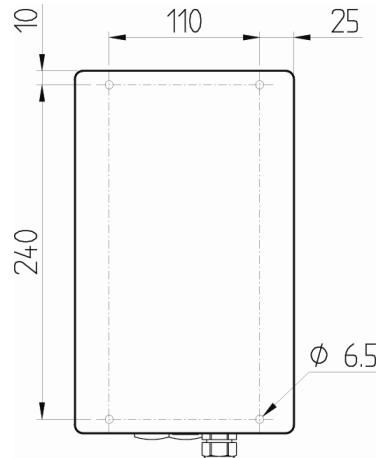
OPERATOR PANEL MOUNTING HOLES
